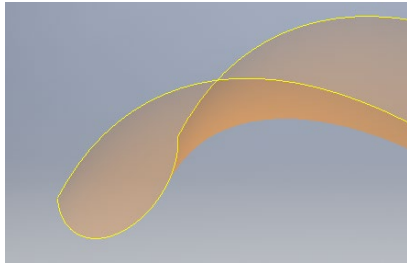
shows the CAD models of the surfaces used in fabricating the test fixtures.
